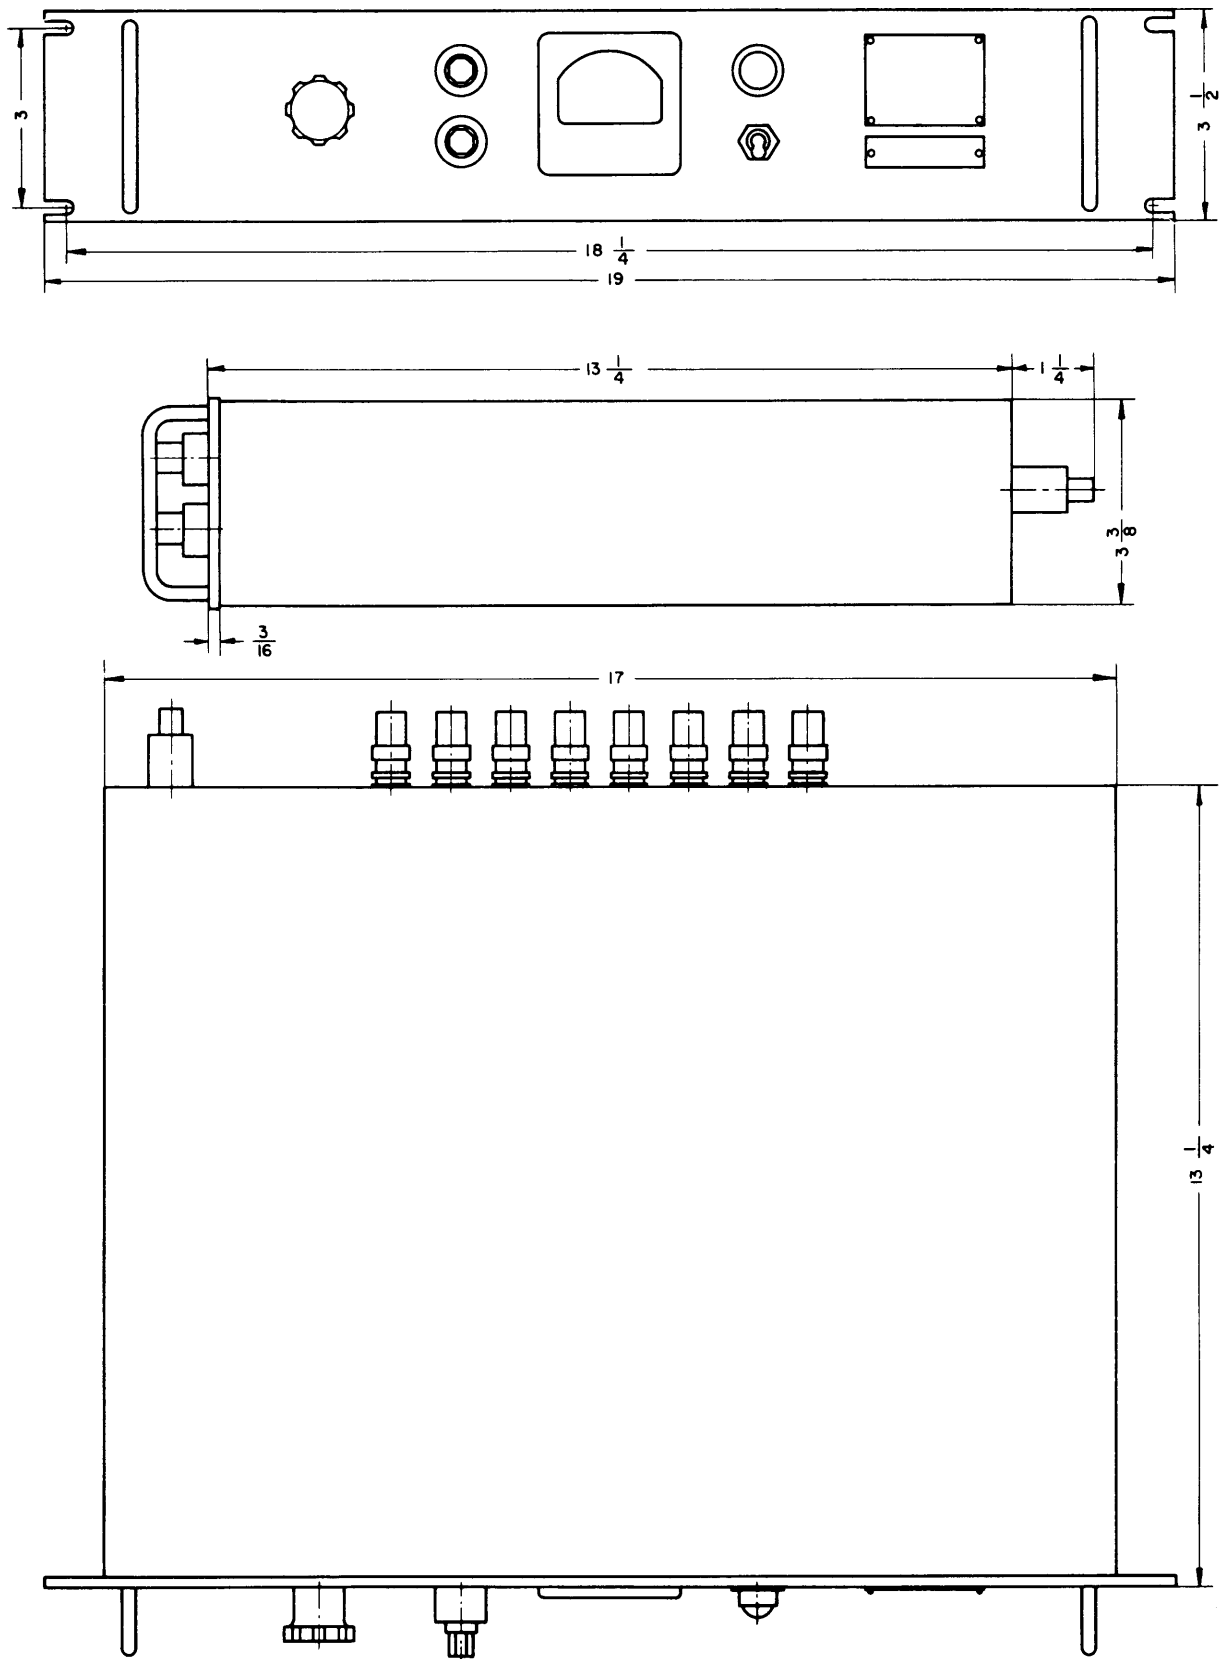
, OUTLINE DIMENSIONS, AMC-20
